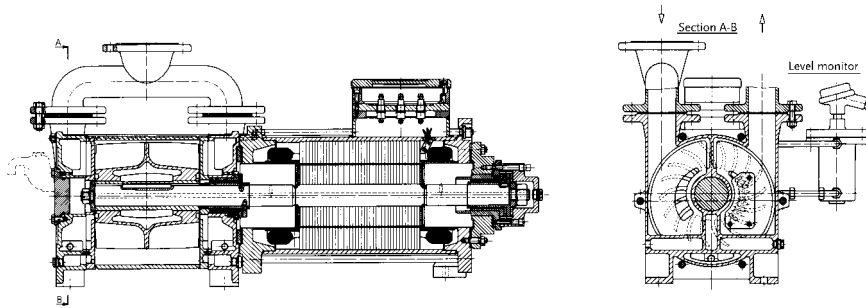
Hermetical liquid ring vacuum pump, single-stage, double-flow design, with canned motor (factory drawing of Lederle-Hermetic)
